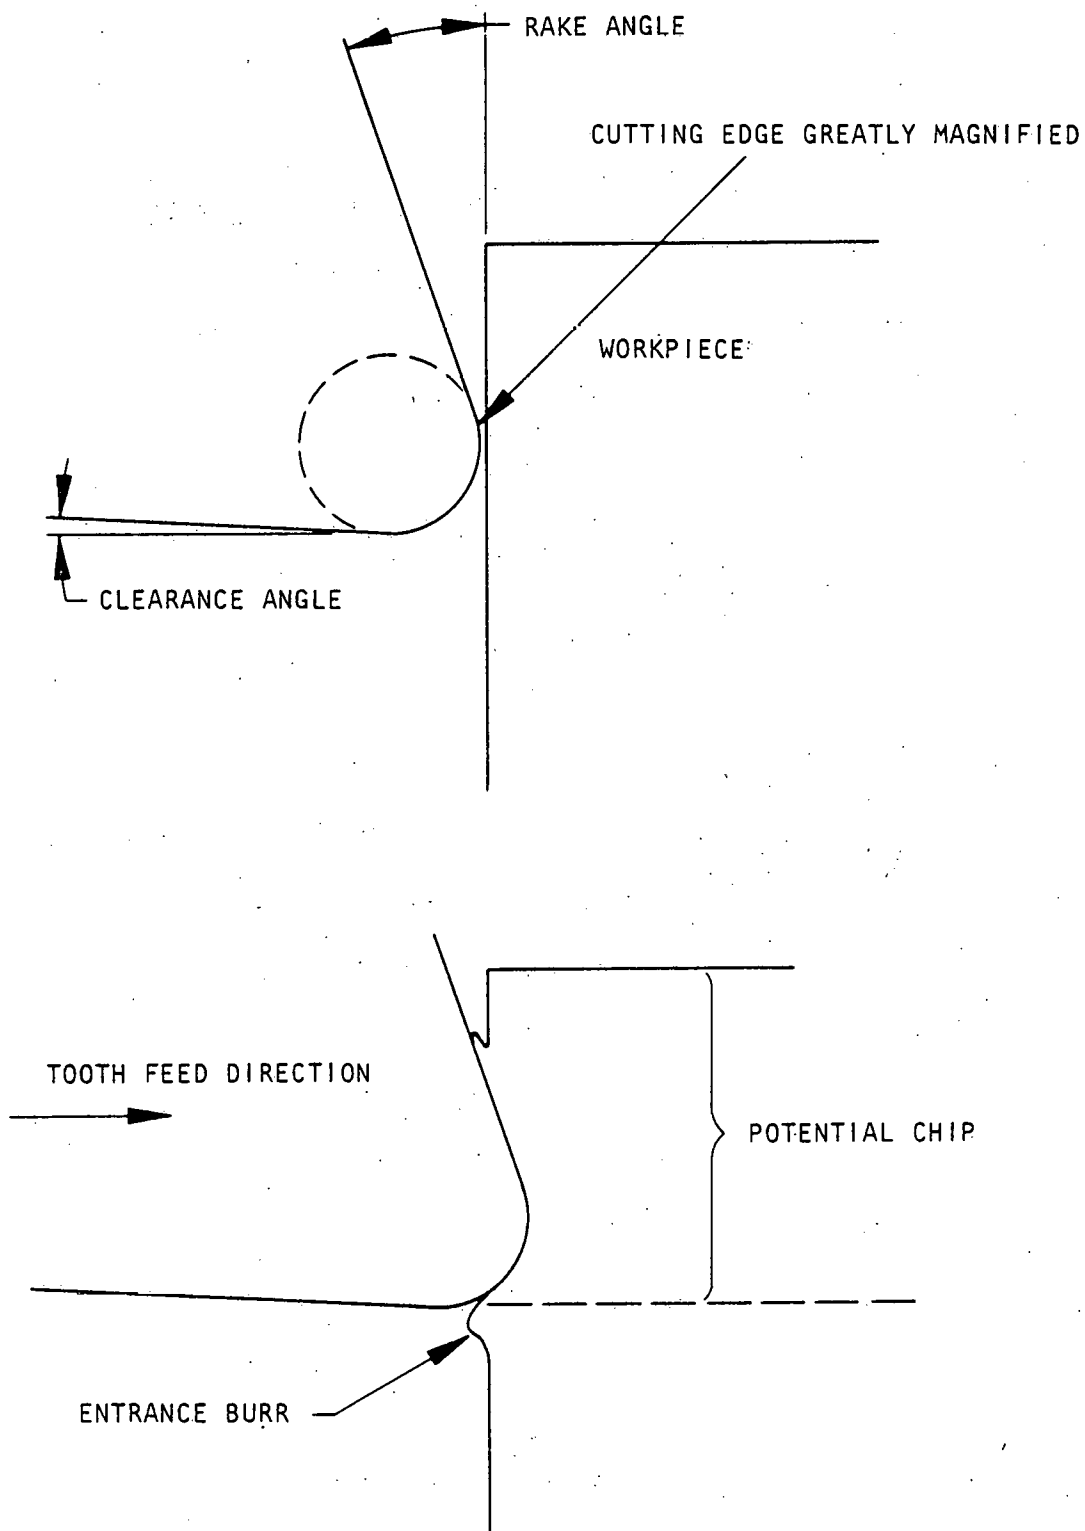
Cutting Edge Produces Indentation Burr as It Enters Workpiece
